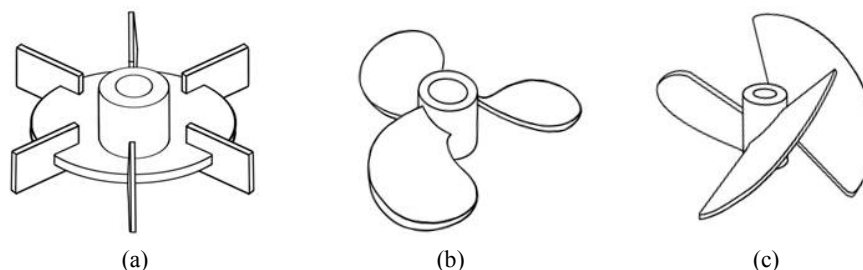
Rushton turbine (a), propeller impeller (b) and elephant ear impeller (c)
